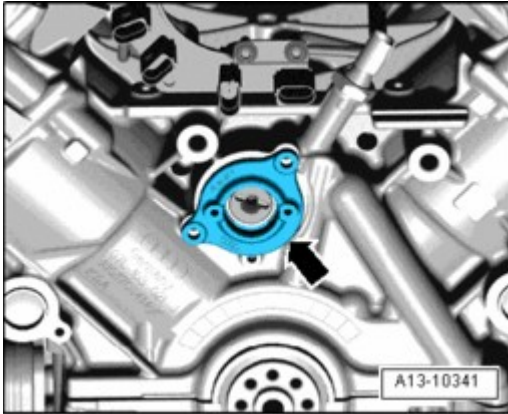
Tightening Balance Shaft Rear Bearing Cap
